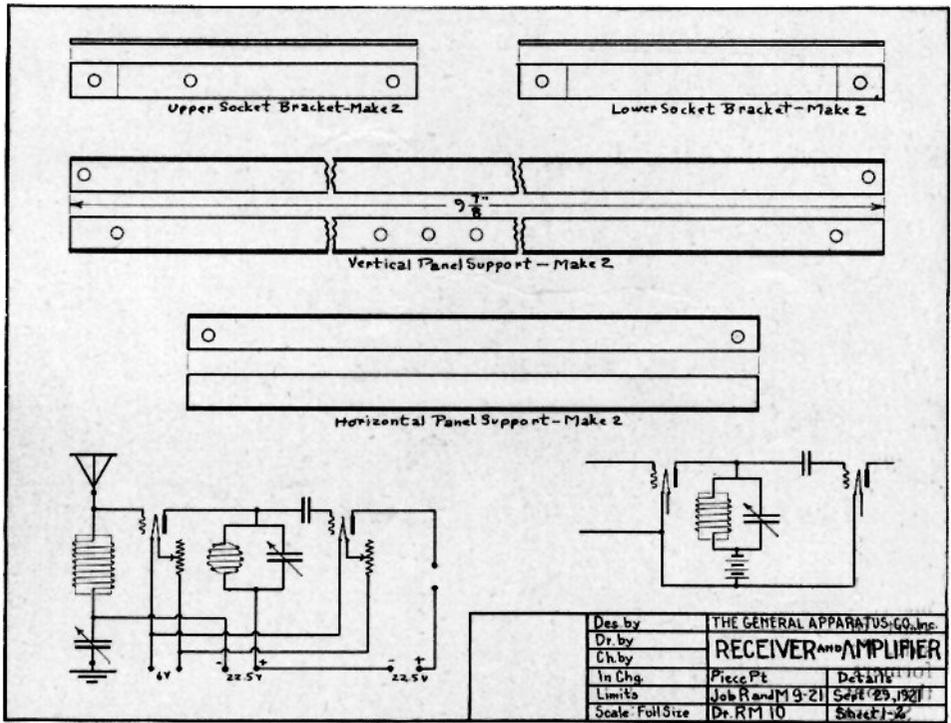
One-half scale. Circuit details and scale drawings of the support frames.
